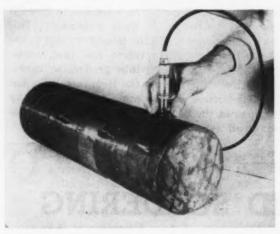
The 21/4 megacycle, 1-in. straight unit, used in preliminary test of drill collars.
